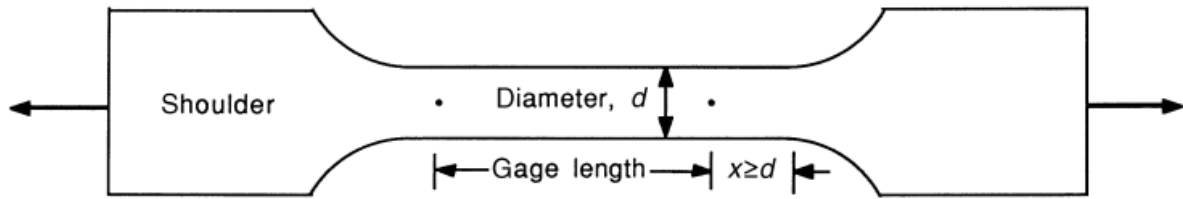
Typical tensile specimen, representing a reduced gauge section and enlarged shoulders. Reprinted from [11].
